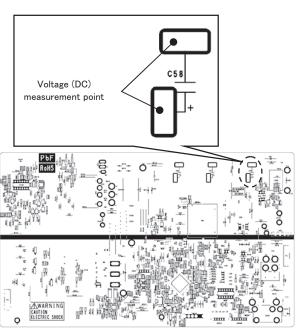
Voltage measurement point (Solder face of PCB (Main))
